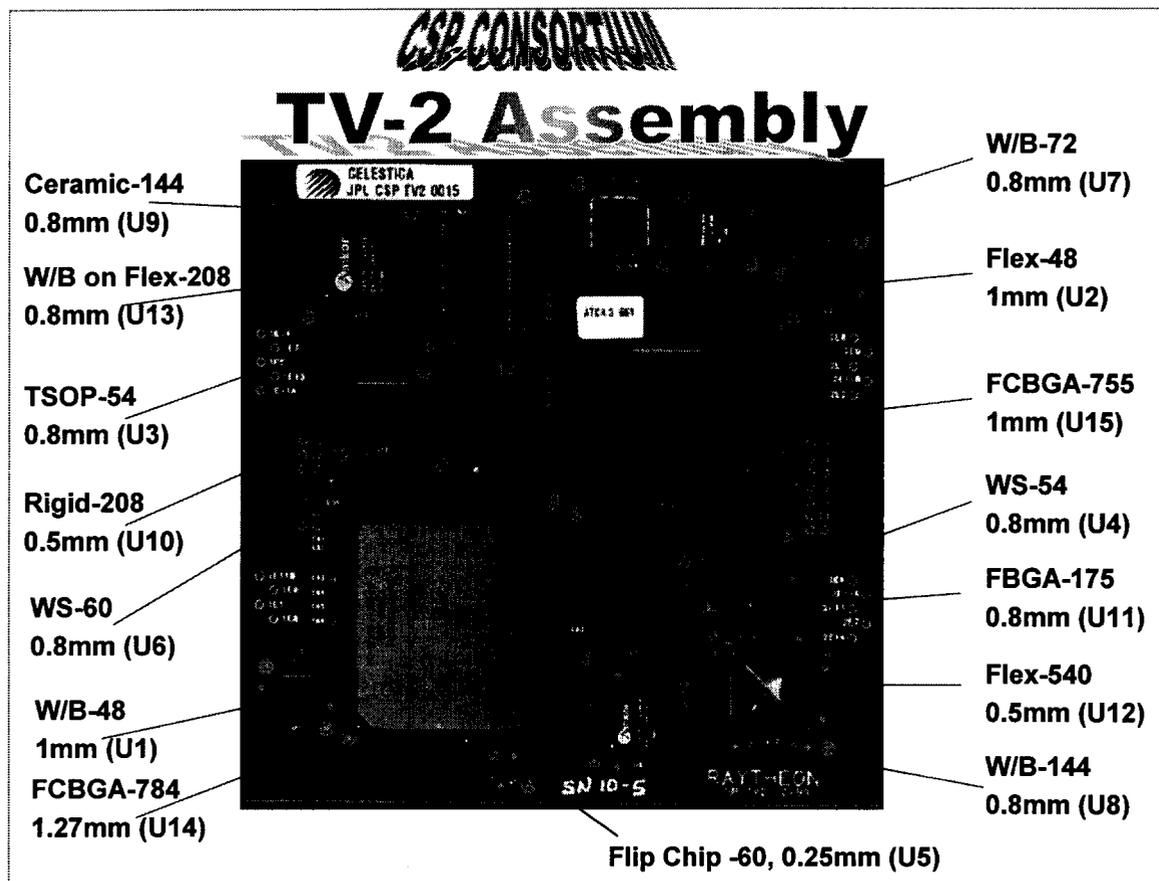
JPL Consortium second test vehicle design (TV-2) with flip chip BGA packages (U14) to flip chip die (U5), all in one board
